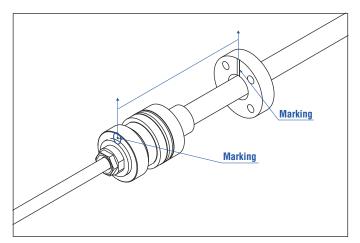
Magnet alignment of ring magnet for RDV EtherCAT[®] with internal linearization using the example of an "S" flange
